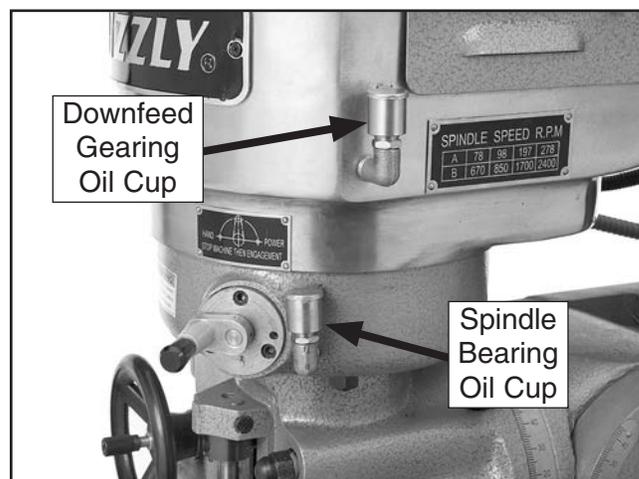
Model G9901/G9902 downfeed gearing and spindle bearing oil cups.
